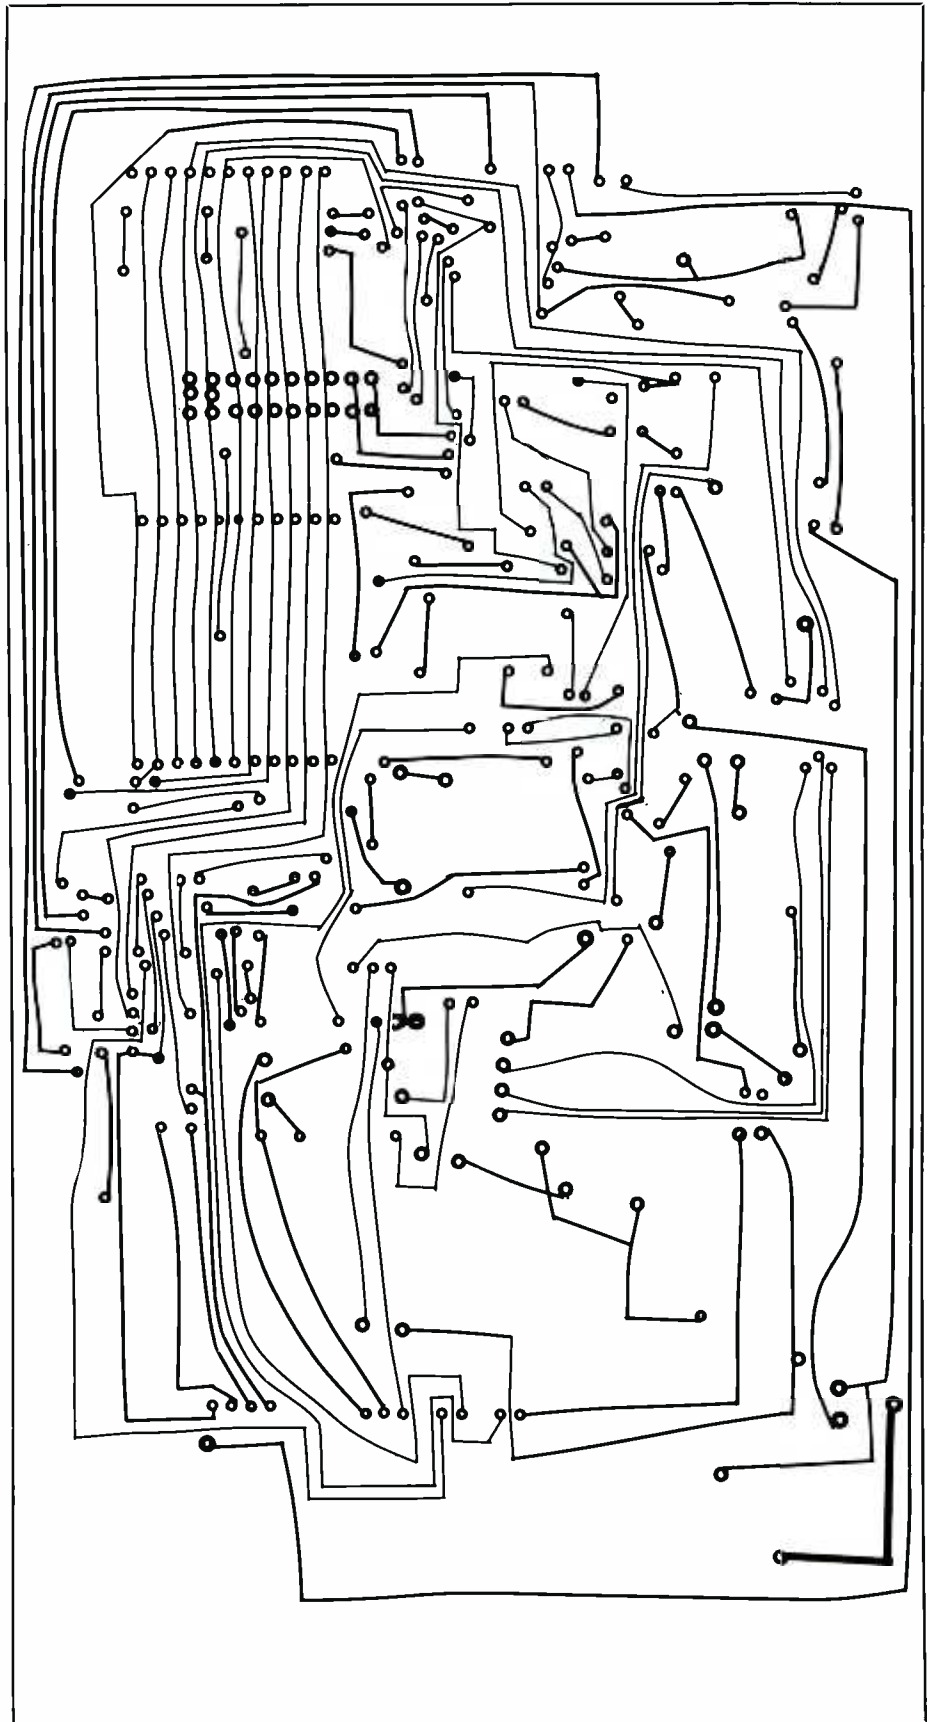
Actual-size etching-and-drilling guide for A/D Memory Expansion module printed-circuit board.
